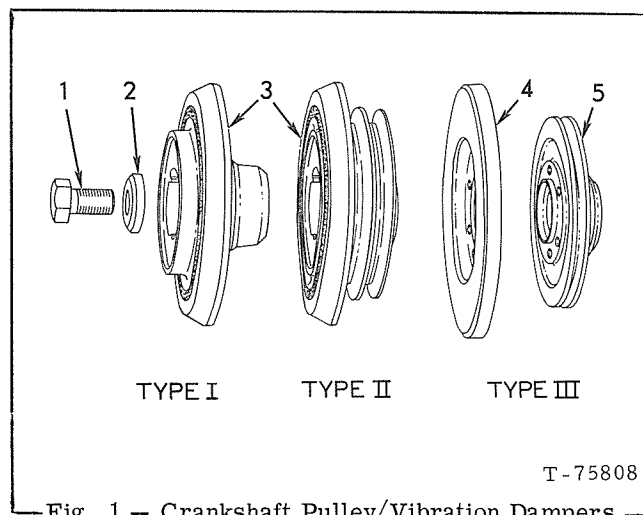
Crankshaft Pulley/Vibration Dampers
